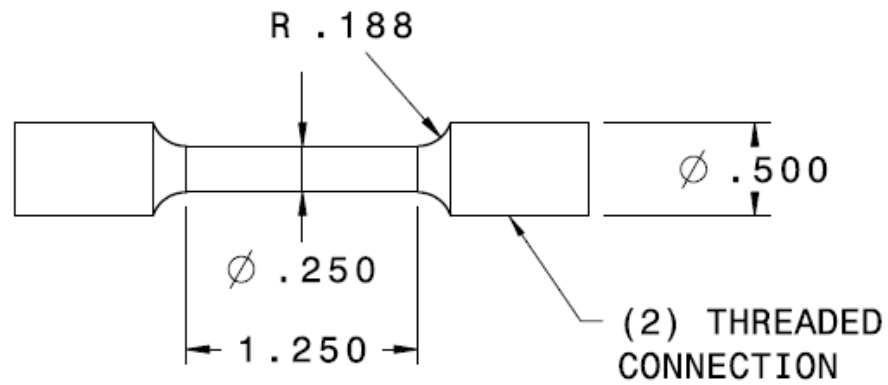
Drawing of round tensile specimen (Dimensioned in inches)
